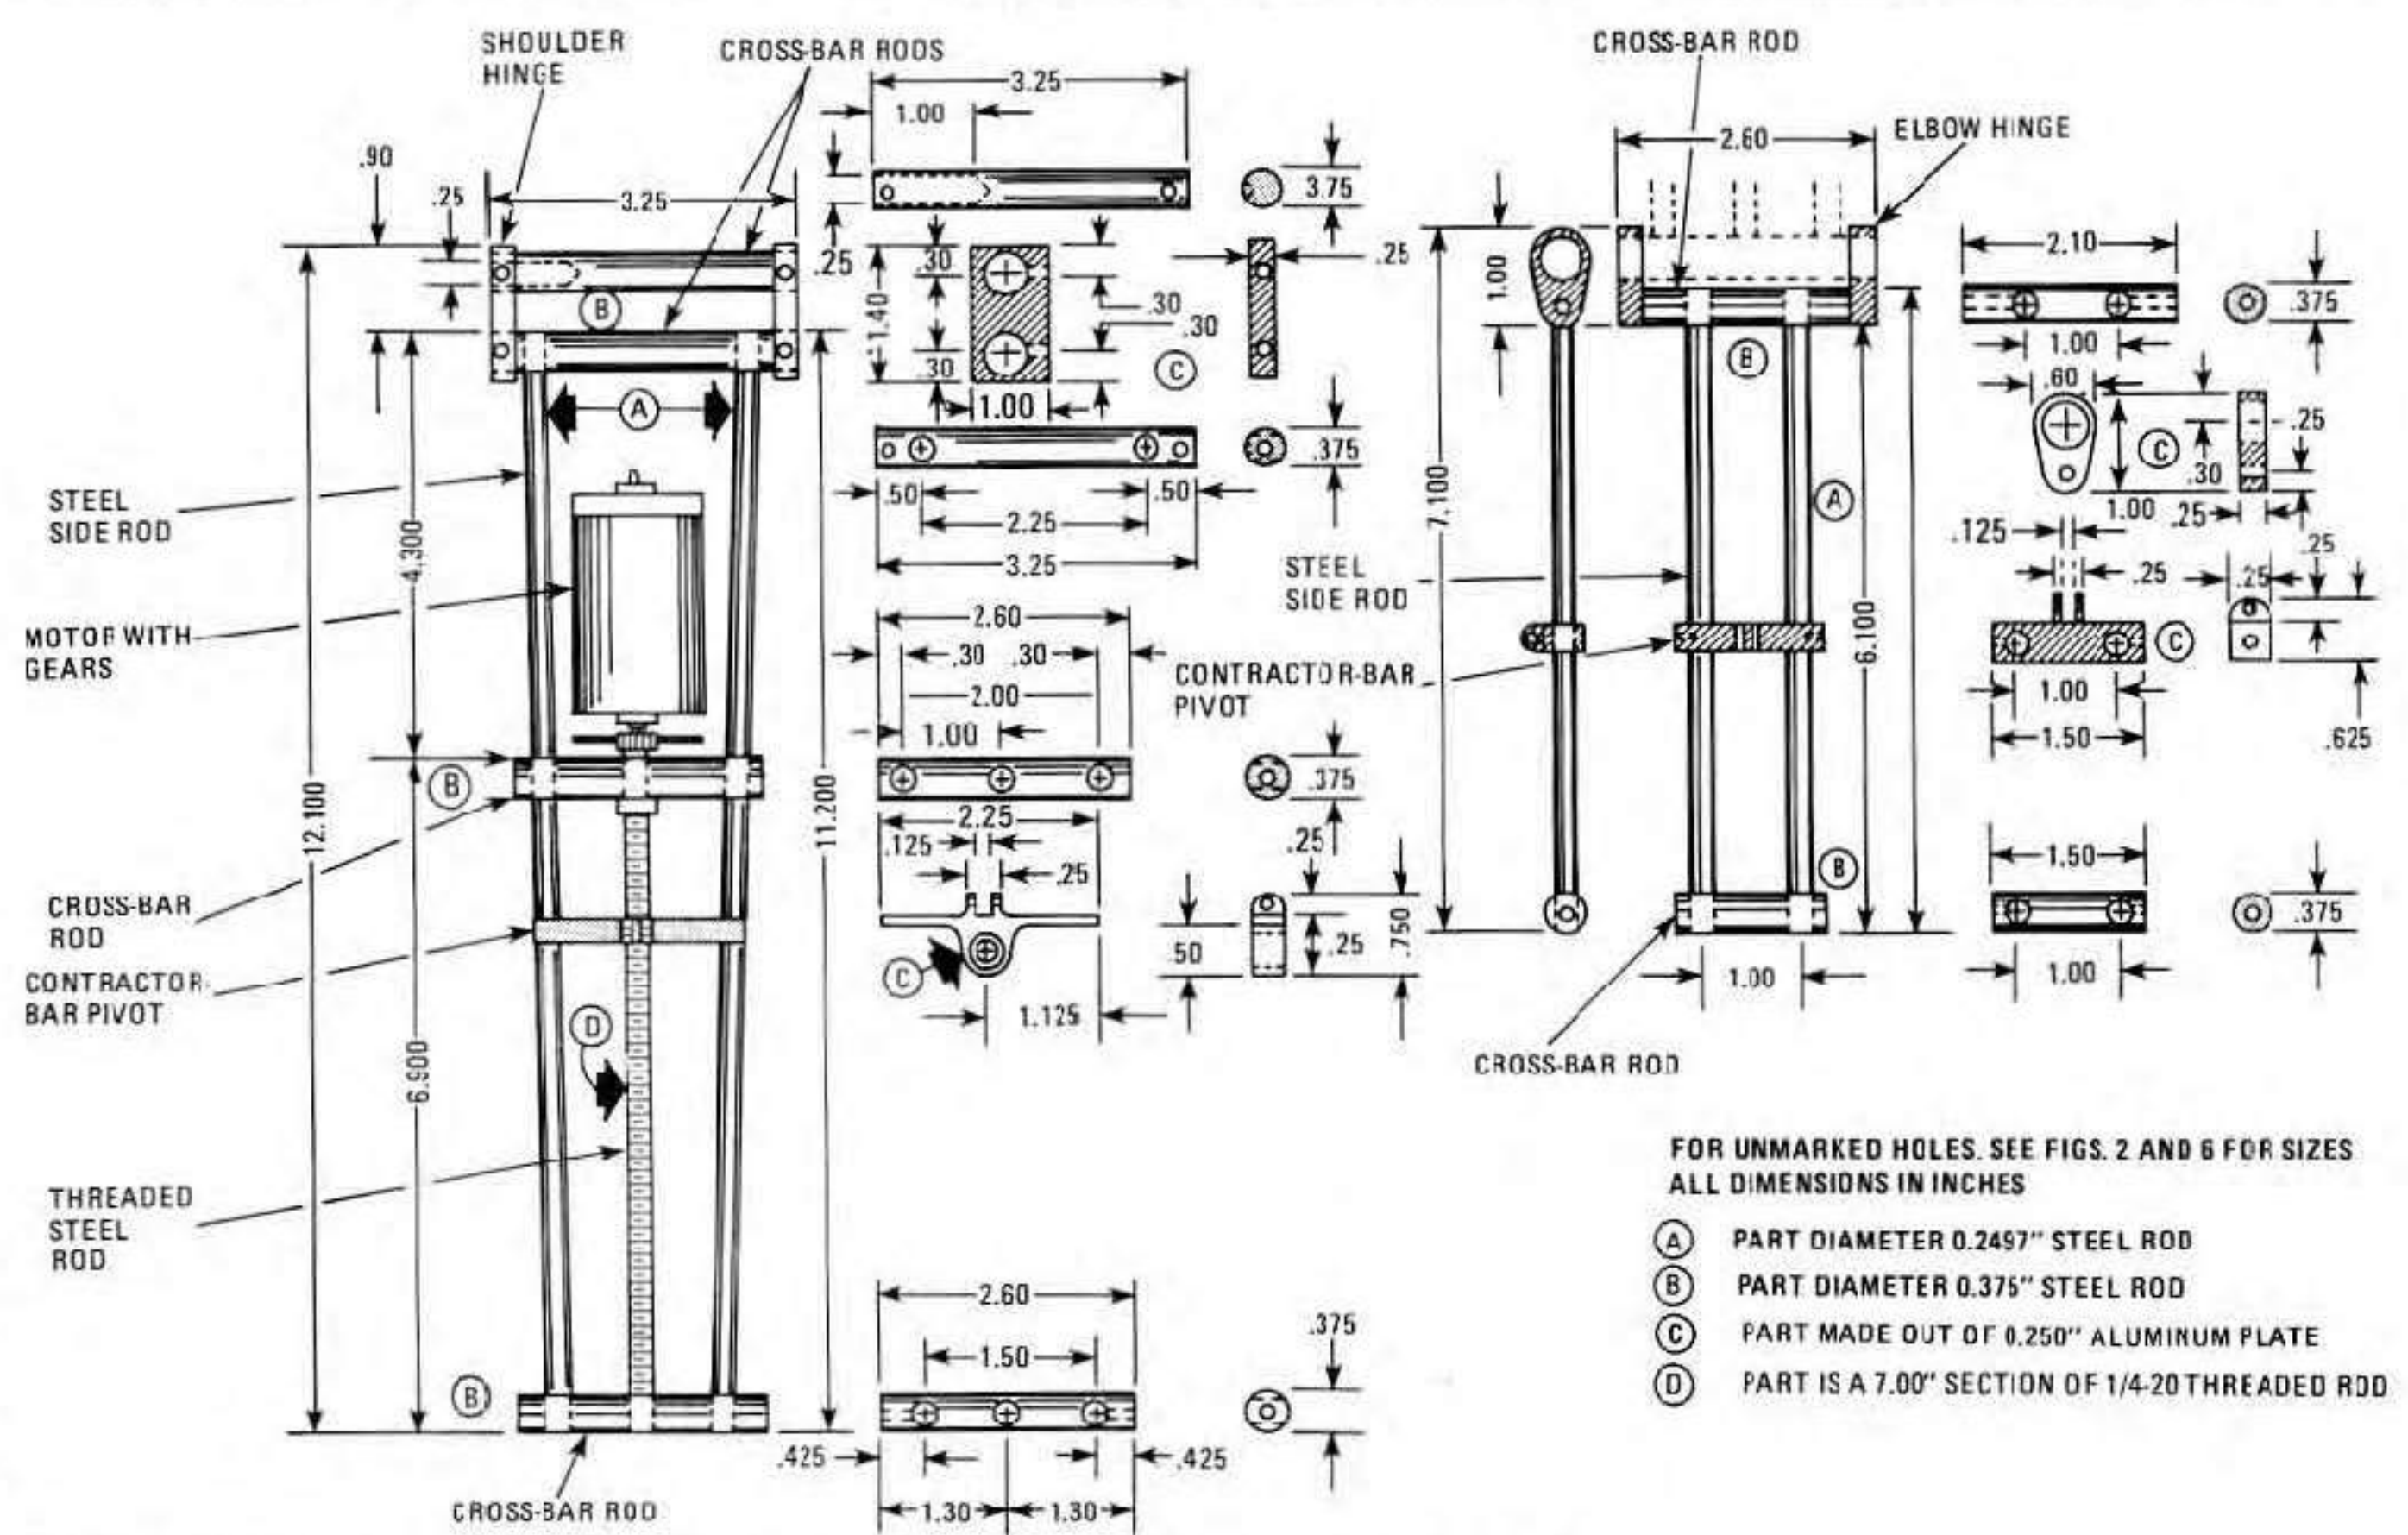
FABRICATION AND ASSEMBLY details of the manipulator. It would be a good idea to make a copy of this and keep it near your workbench for reference.
